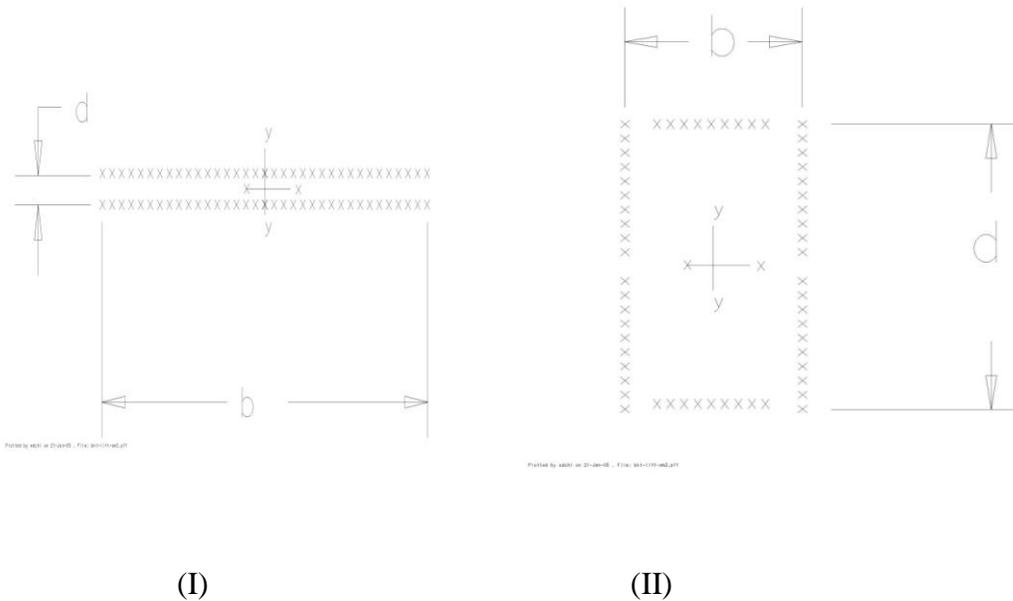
The weld configuration for the two different welding location of the turning fixture (treat as line with unit thickness).
